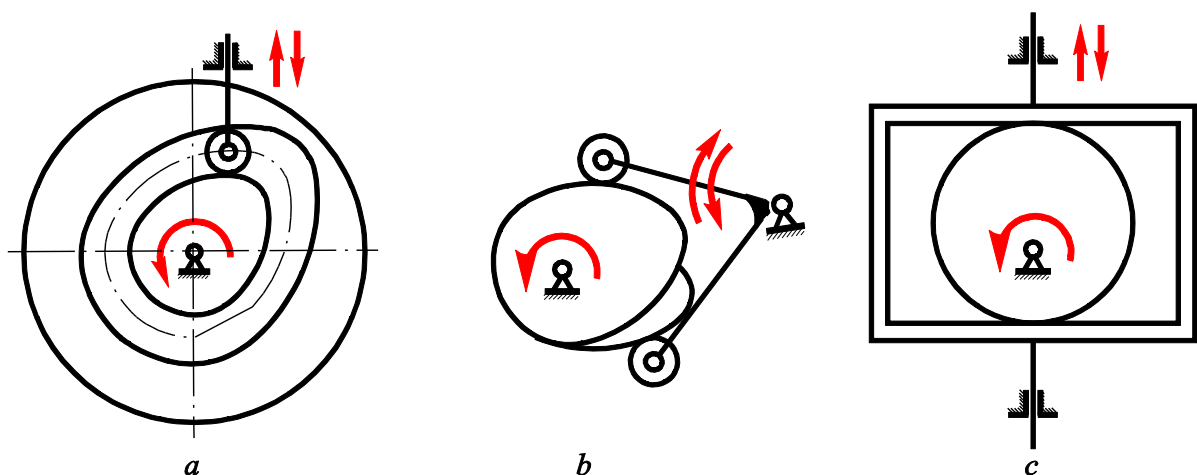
Form closure in a cam mechanism: *a* – face cam; *b* – conjugate cam; *c* – diametrical cam
